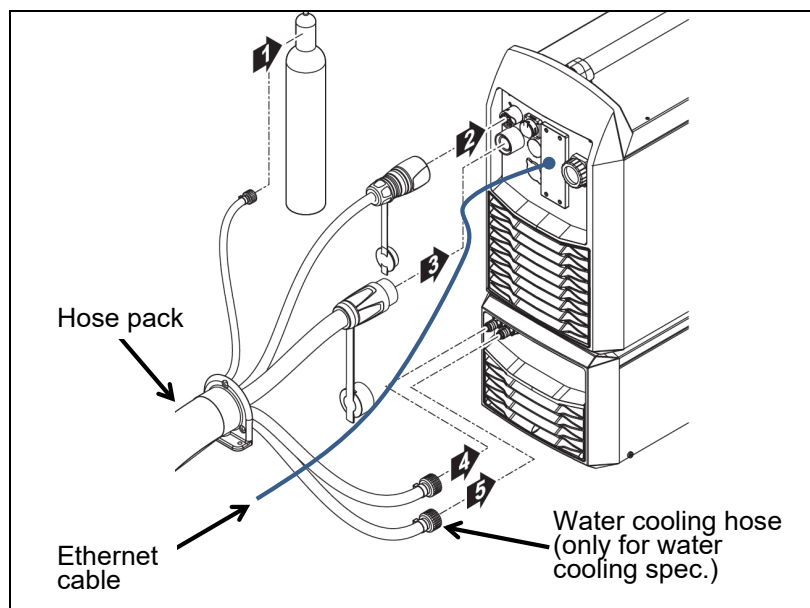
(a) Replacing the welding power supply (1/2)
